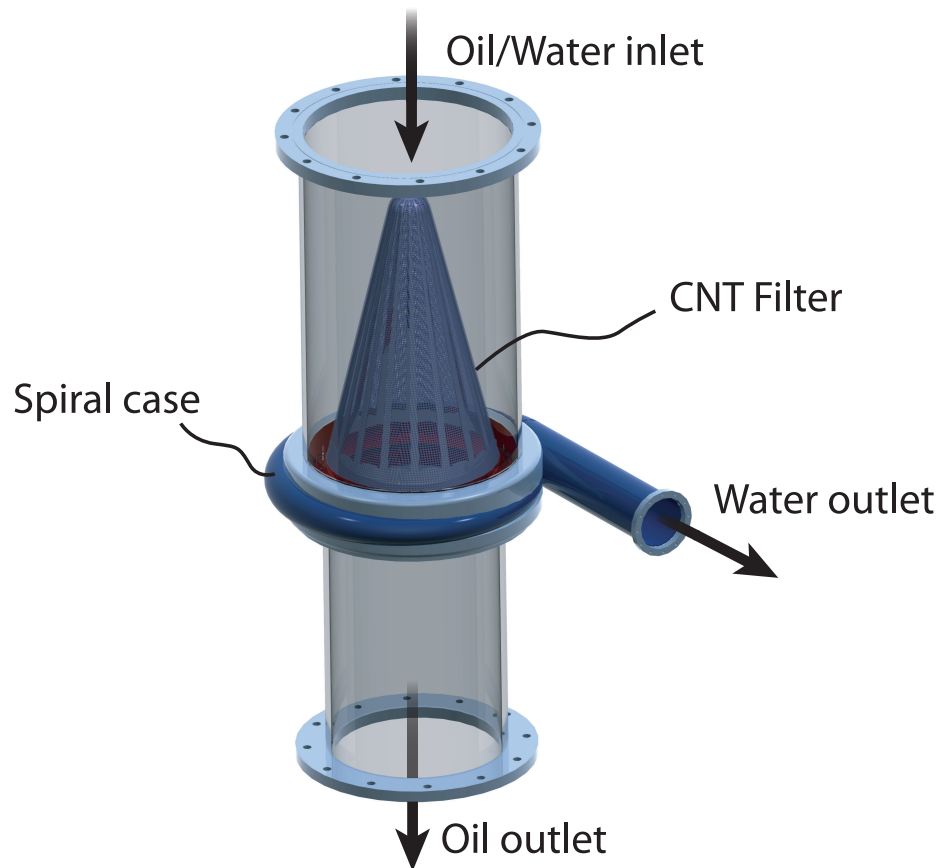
Illustration of oil drier with CNT membrane assembly.
